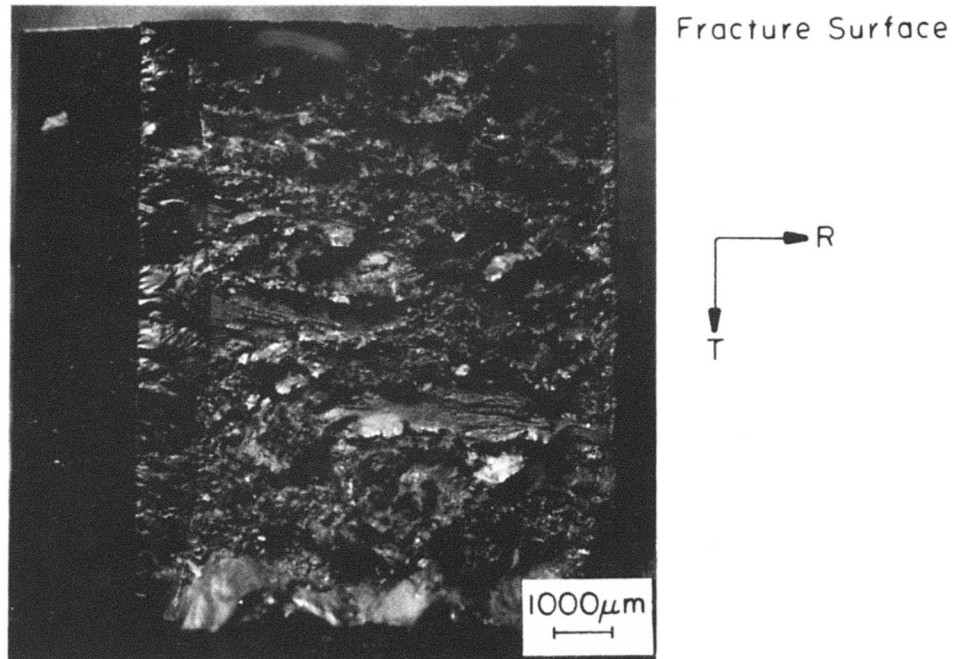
Alloy 334, sample 4ELR10. Fracture surface X8, crack path X500.
